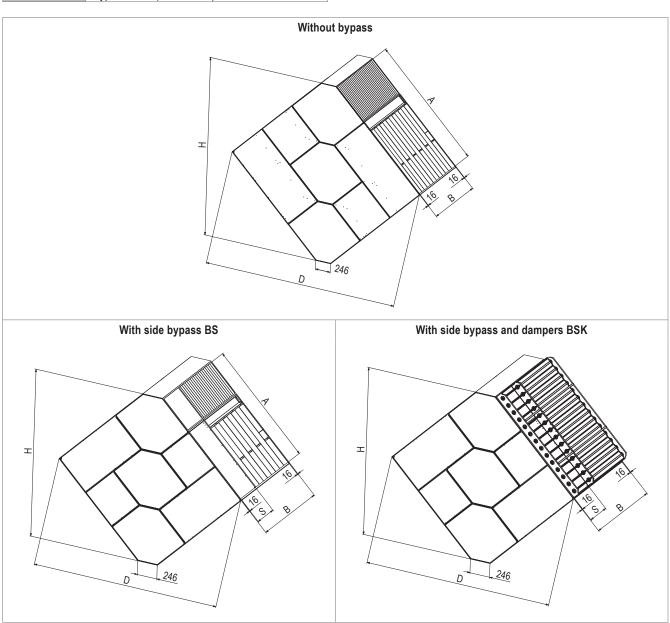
Dimension sheet for Gotthard plate heat exchangers of construction type C (dimensions in mm)
